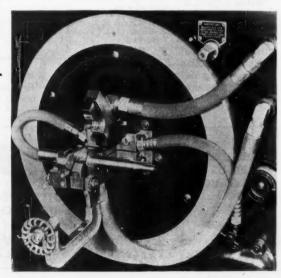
Hinged Inductor Incorporating Spray Quench for Surface Hardening Crankshaft Bearing Journals
